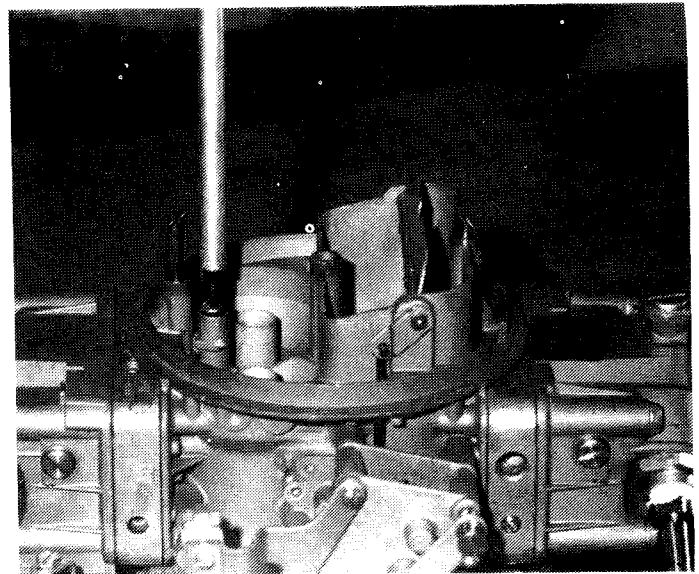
Accelerator pump discharge nozzles are changed by removing large phillips' hold down screw. NOTE: there is a small gasket under the screw head and one between the nozzle casting and the main body.
